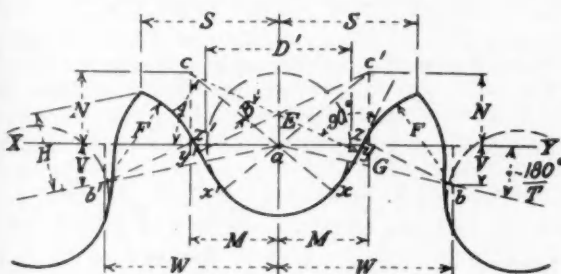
DESIGN OF STANDARD SPROCKET TEETH
